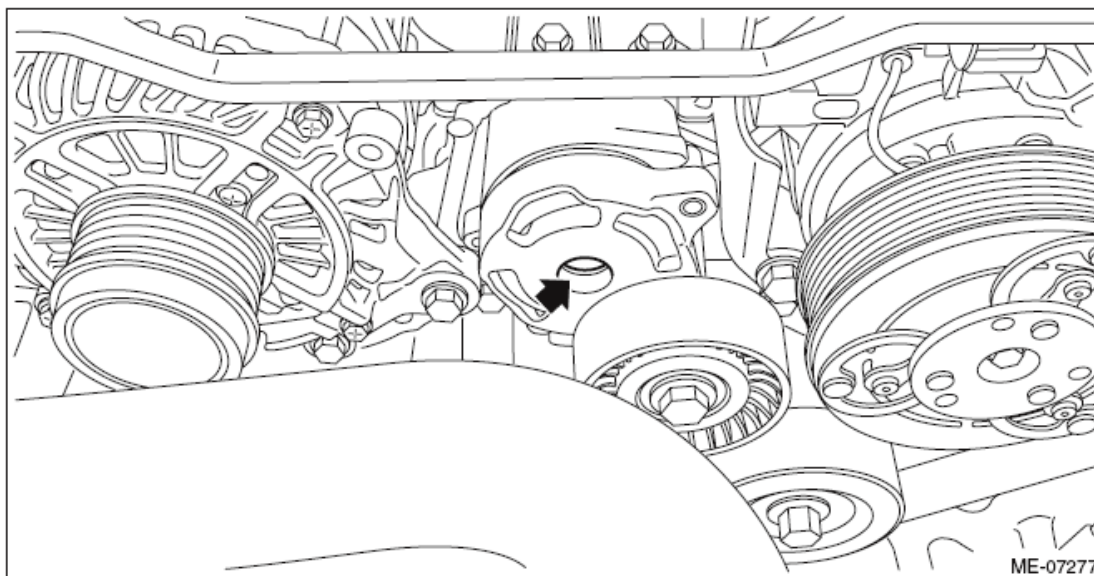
Locating V-Belt Tensioner Assembly Bolt
